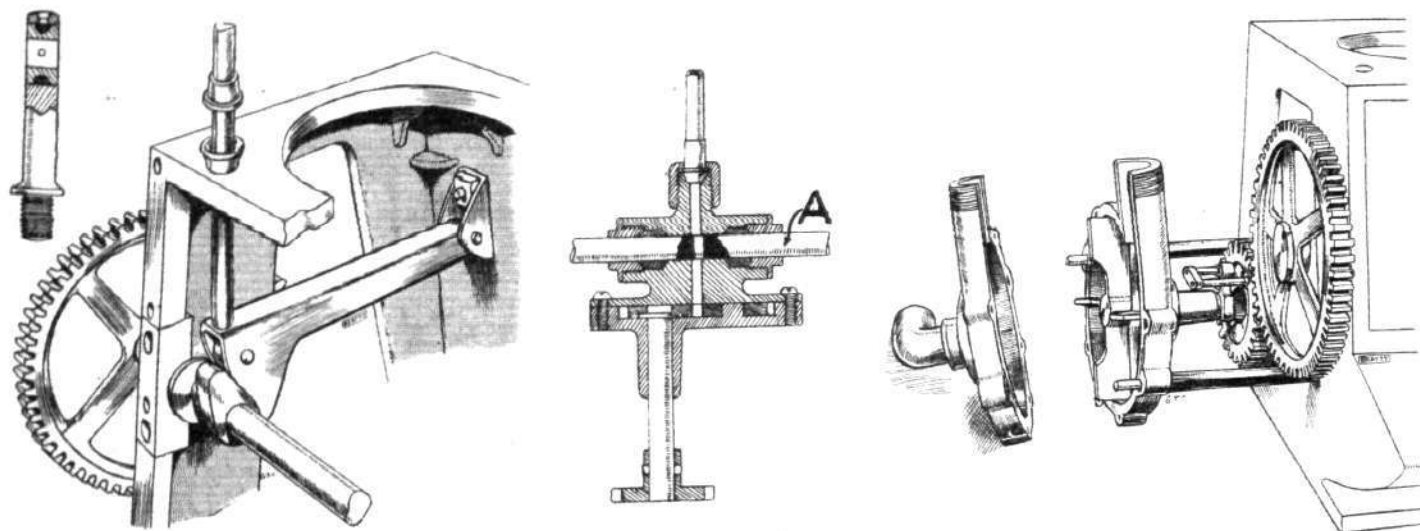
Beatty Aero Engine Details.—On the left, the tappet mechanism of the 40-45 h.p. motor; in the centre, a sectional view of the petrol pump of the 80-90 h.p. engine; and on the right, the water circulating pump and its driving gear of the 40-45 h.p. engine. In the extreme left top corner is seen the valve-rocking lever support on the Beatty aero engines.
